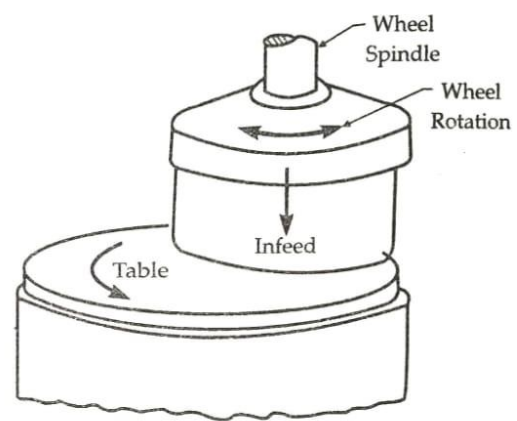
Relative movements of different parts of a Vertical Spindle Rotary Table Surface Grinder.
